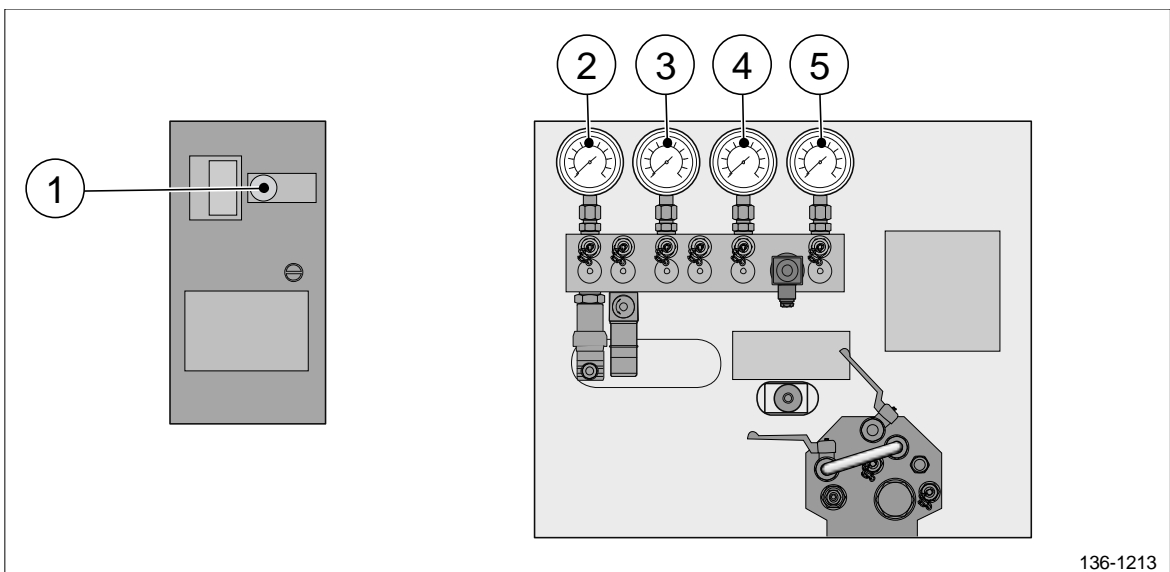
Oil pressure gauges located on the hydraulic power pack control panel.
